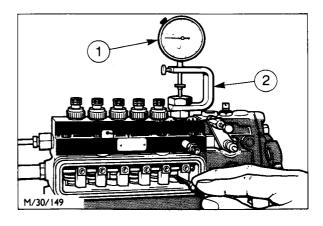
Fig. II - Measuring the Stroke to Close the Inlet Port I. Dial Gauge 2. Plunger Head Clearance Gauge
